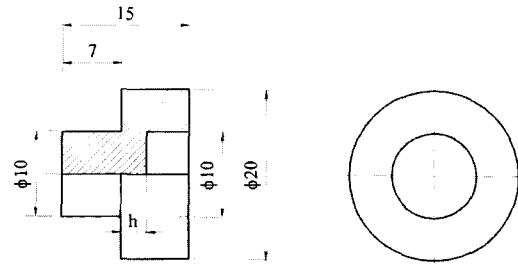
Section view of hat-shaped specimen of SHPB shear test
